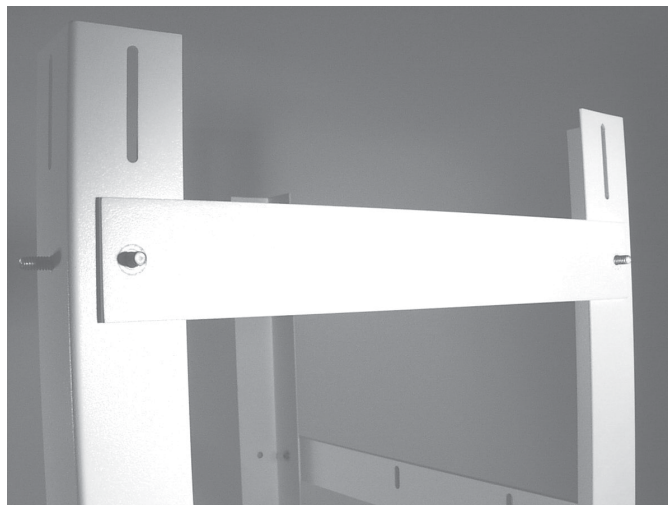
Holding the screw with a screwdriver while turning the nut.
